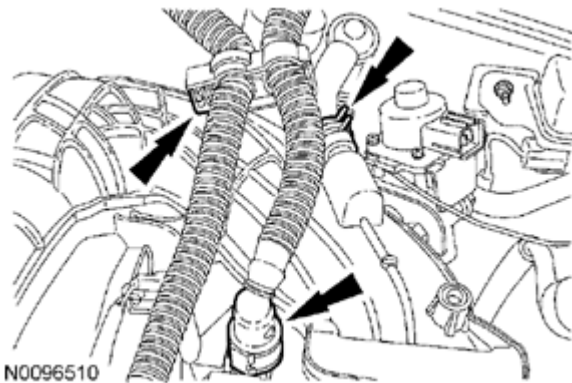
Locating EVAP Tube-To-EVAP Canister Purge Valve Quick Connect Coupling And Brake Booster Vacuum Tube
